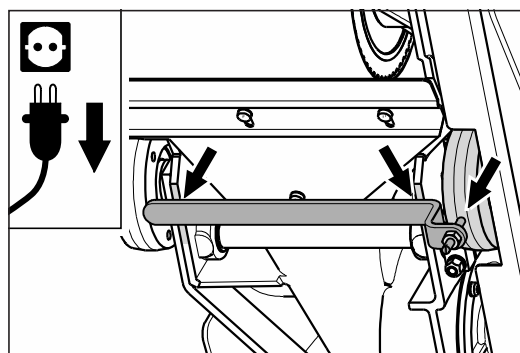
Remove the current setting fixture from the right-hand wheel (seen from below).
